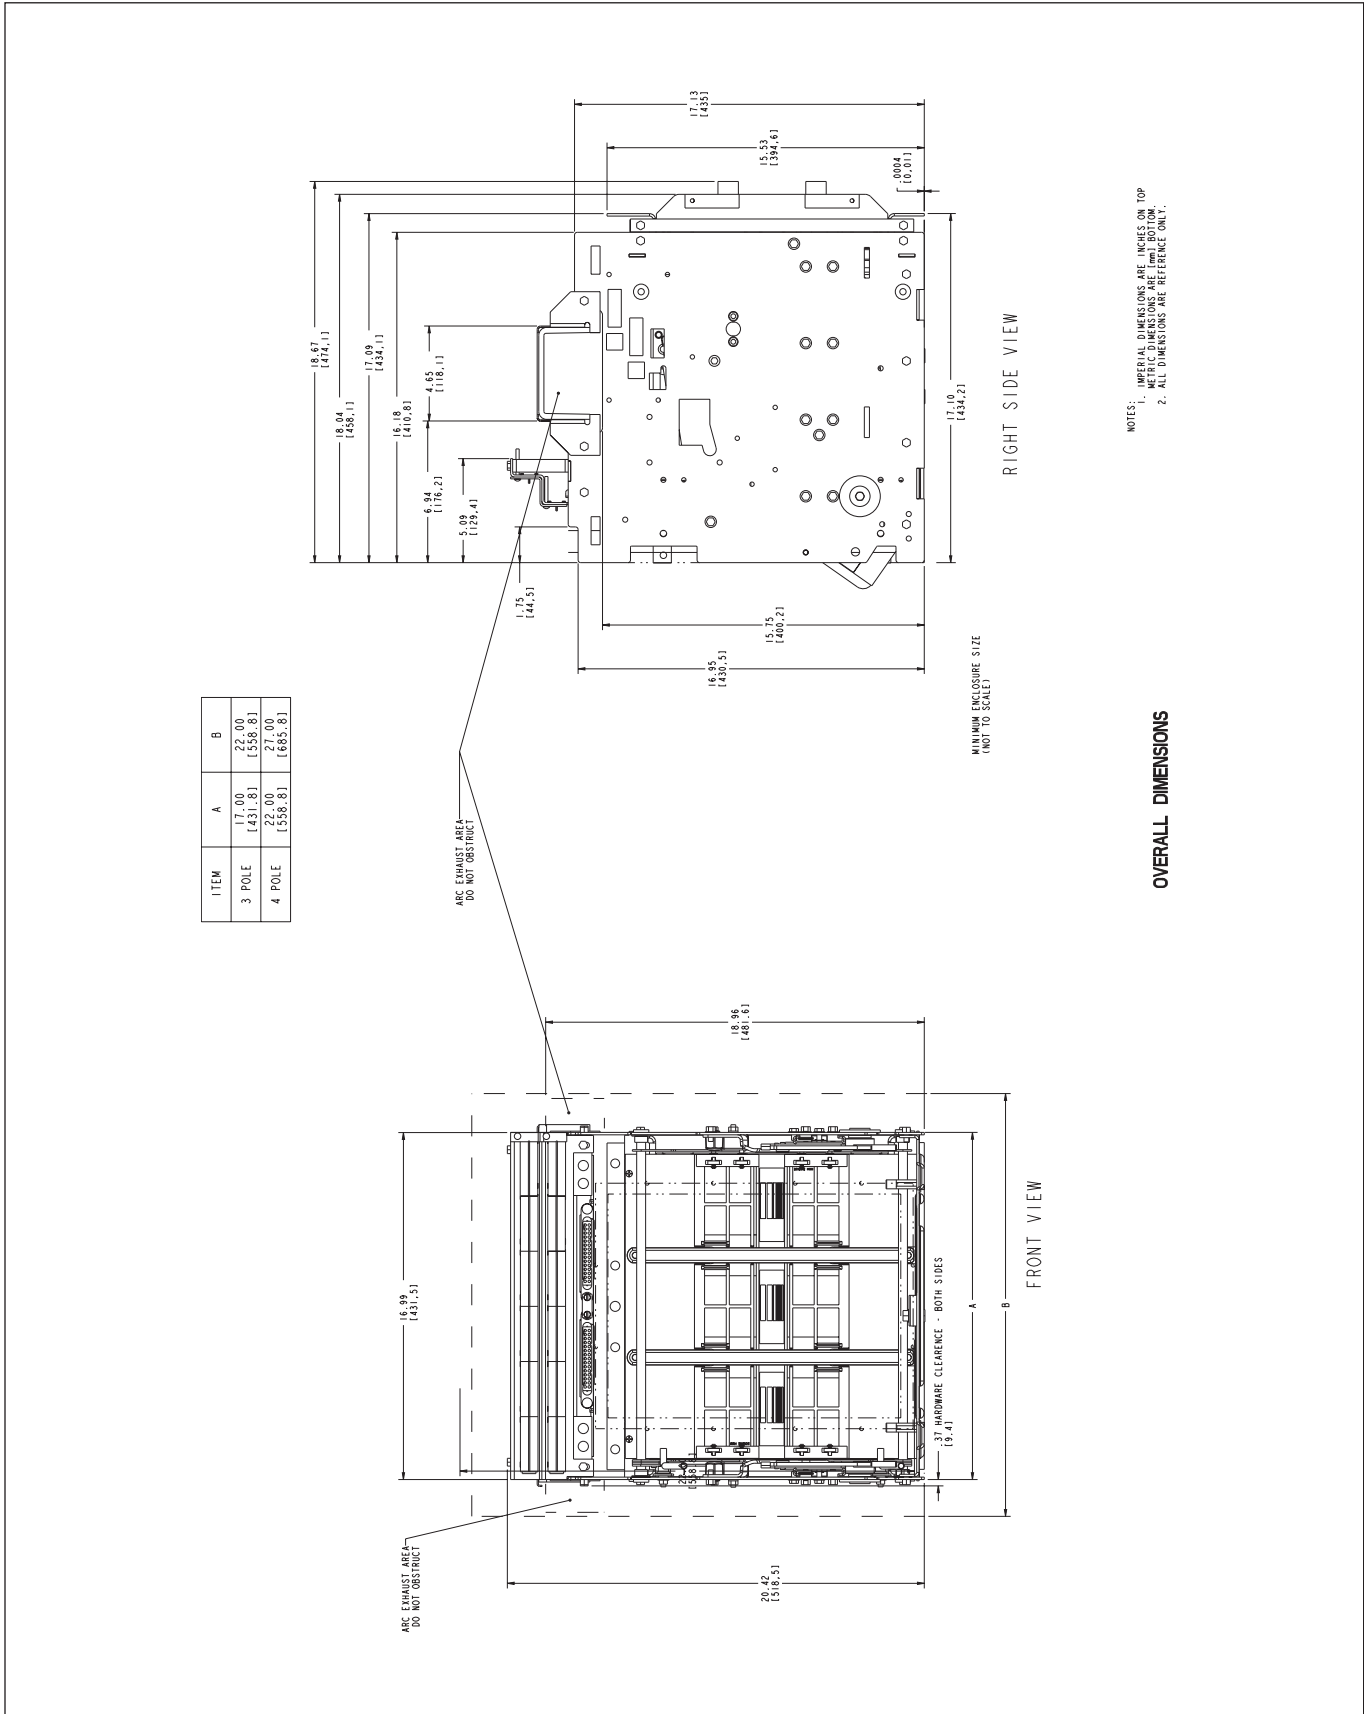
800-3200A Standard frame Cassette (Accessory dimensions)
